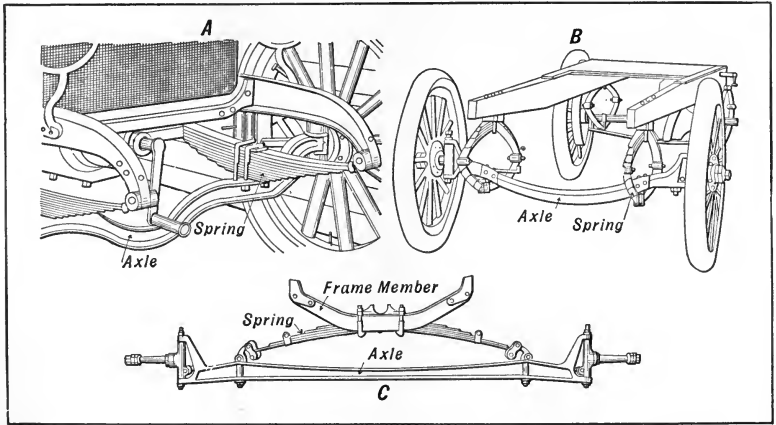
Spring Suspension Means for Front Ends of Motor-Car Frames. A—Semi-Elliptic. B—Full Elliptic of Franklin Car. C—Single Cross Spring of Ford Design.
